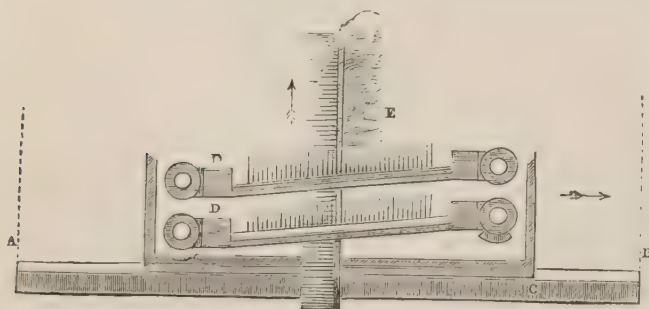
RAMSBOTHAM AND BROWN'S MACHINE.
